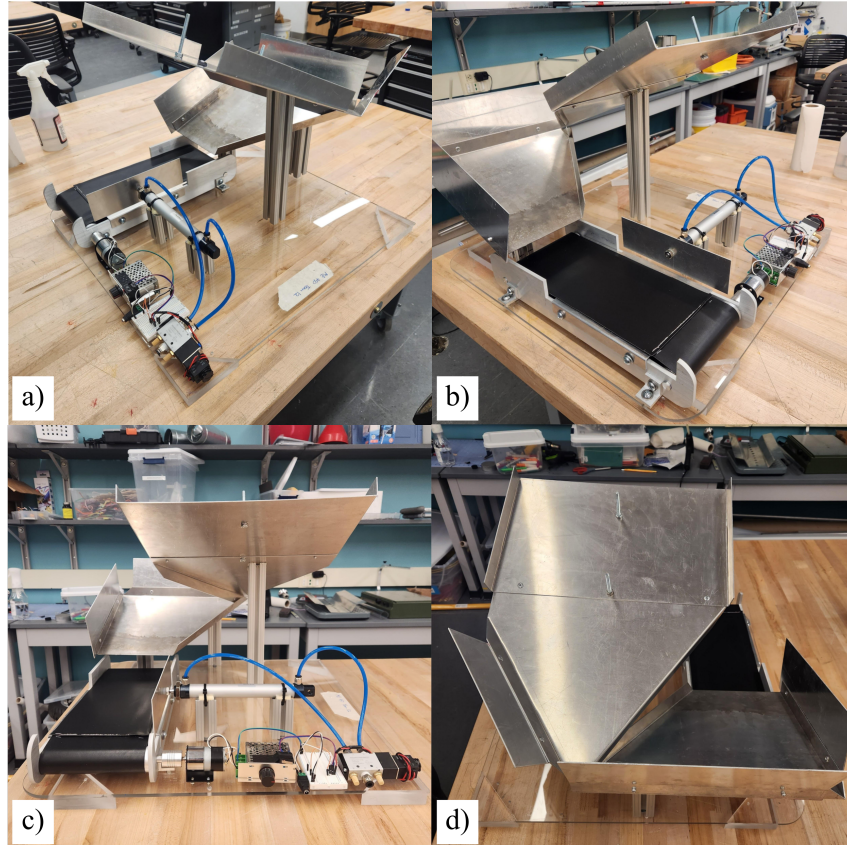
Images of the final physical prototype. a) Front isometric view of the model. All three subsystems are assembled on a square 60cm x60cm acrylic board. b) Back isometric view of the model. c) Front view of the model. The electronic components are organized on one edge of the board for easy access and control. d) Top view of the model. The “Pachinko” mechanism is imitated using long screws.
